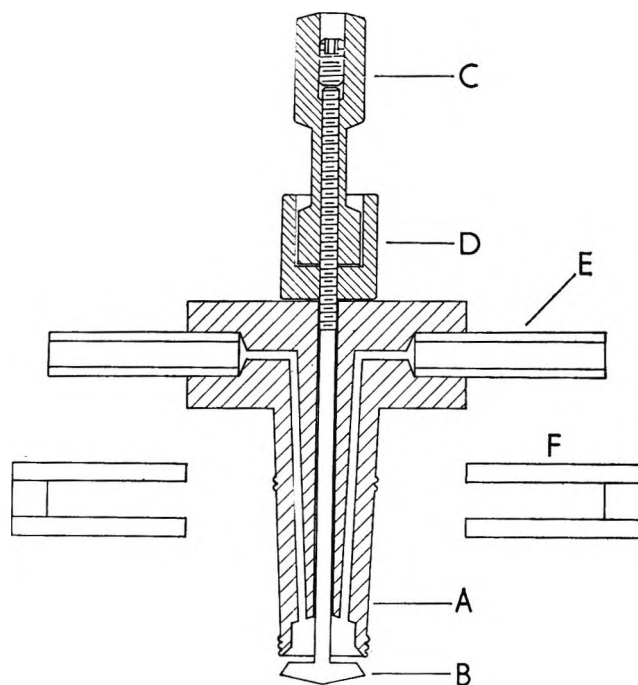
Sectional view of the assembly of the bottom plug: A, Teflon body; B, stainless steel valve; C and D, brass knobs; E, glass tubes; F, rubber sleeves.
